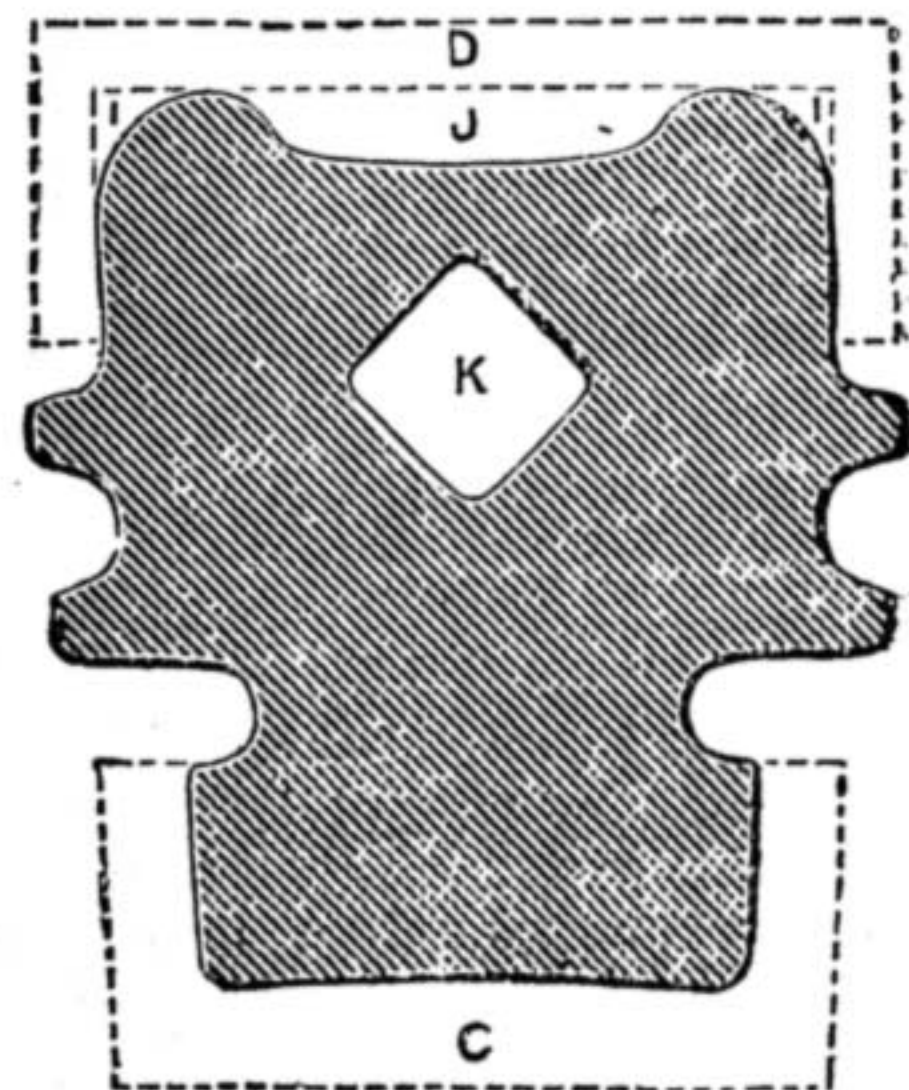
Section of Indiarubber Felloe-Rim—C, Flanged Rim holding Ends of Spokes; D, Flanged Tyre on Felloe-Rim; I, J, I, Spaces between Rubber and Tyre; K, Centre Hole running through Tyre.
